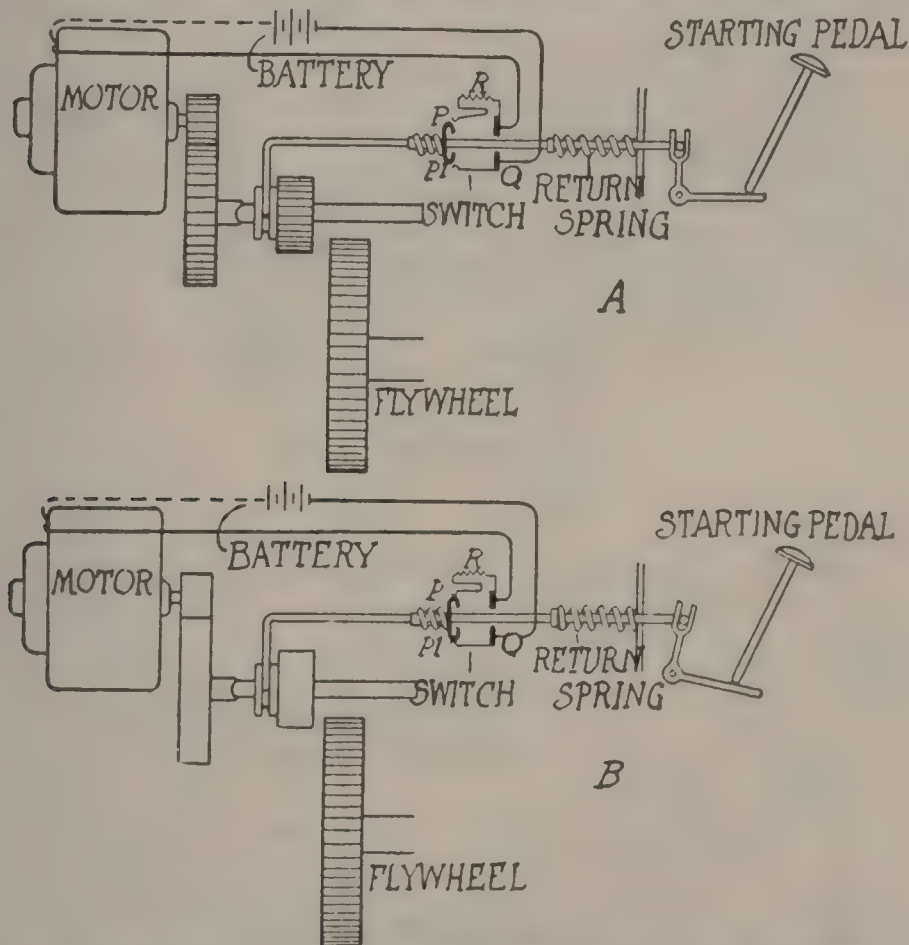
Westinghouse system—A gives the "off" position of the shift pinion and switch contactor; in B the motor circuit is closed and the motor starts at low speed
